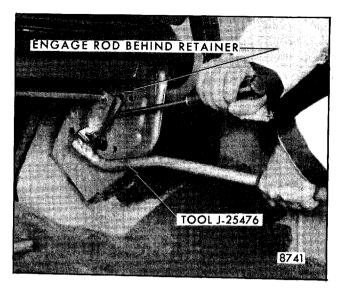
Torque Rod Engagement - Cadillac K Style
